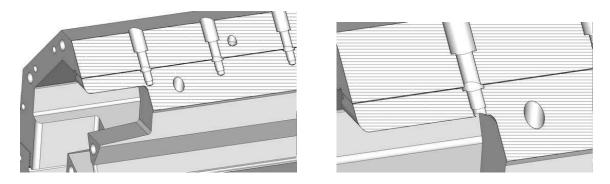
Cross-section through vane showing possible interference with bolt hole. (Left) Vane before machining. (Right) Vane after machining.
